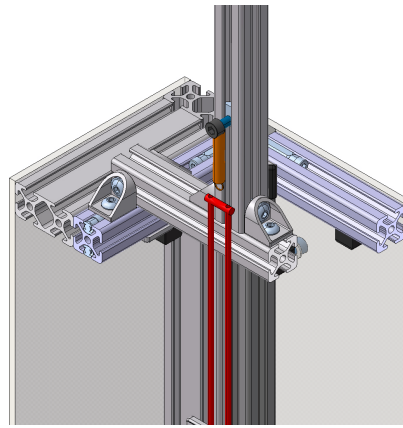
Addition of a spring on the static part of the braiding machine. Spring coloured orange and guiding mechanism red.
